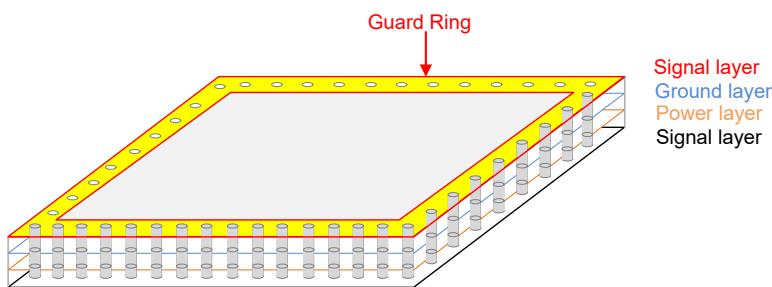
Side View of Guard Ring on 4-Layer Circuit Board
